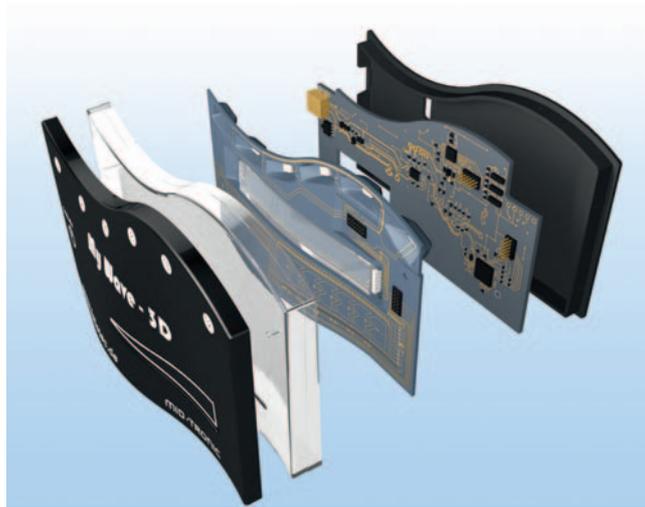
The exploded view shows all layers of the MyWave-3D: (from left to right) three-dimensionally formed IML film, molded-on transparent part body, 3-D circuit board for the functional electronics, flat circuit board for the control electronics, back cover
